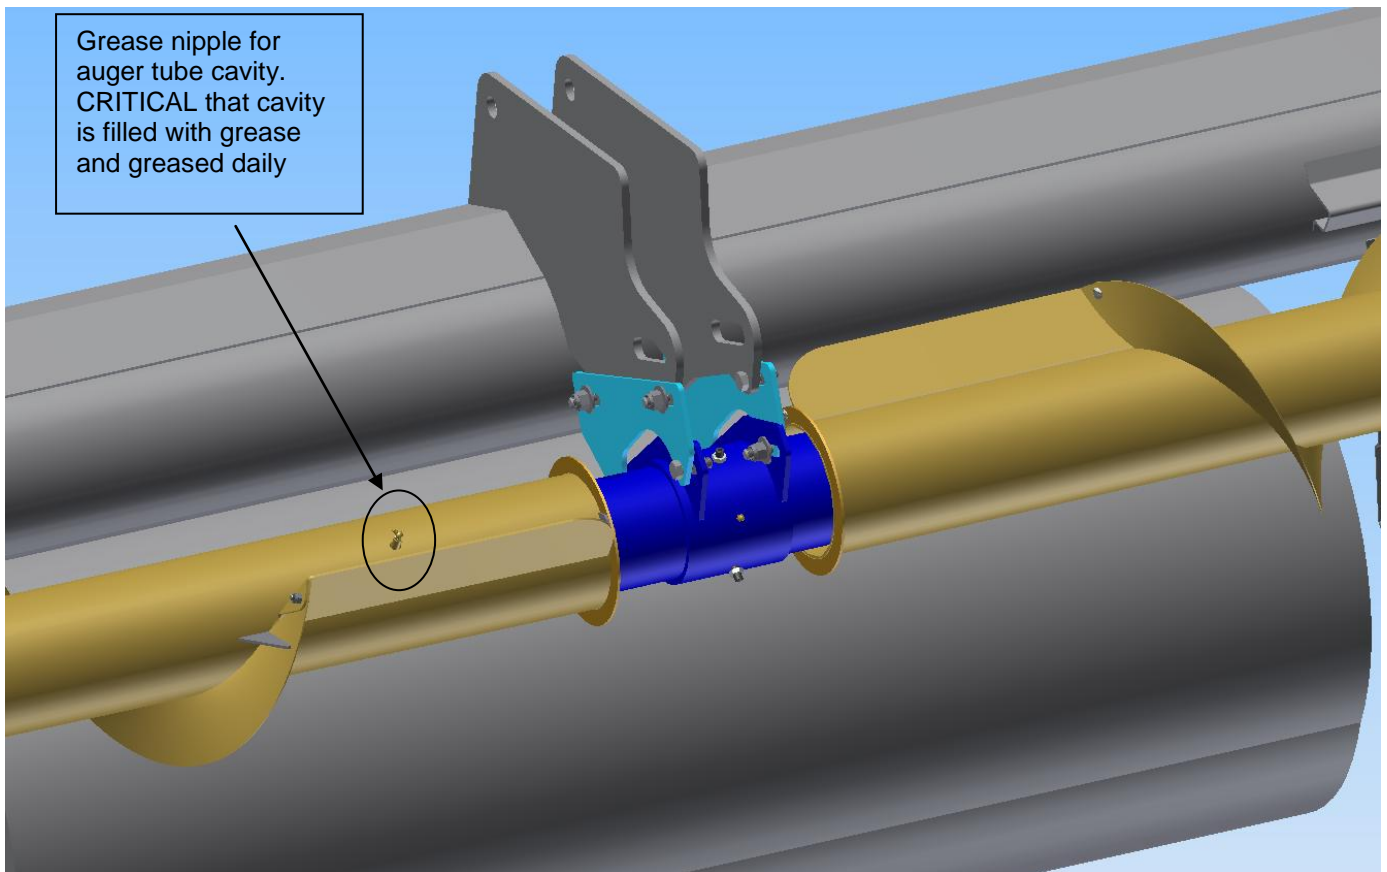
CENTER MOUNT ADAPTER (LIGHT BLUE) AND BEARING MOUNT (DARK BLUE)
